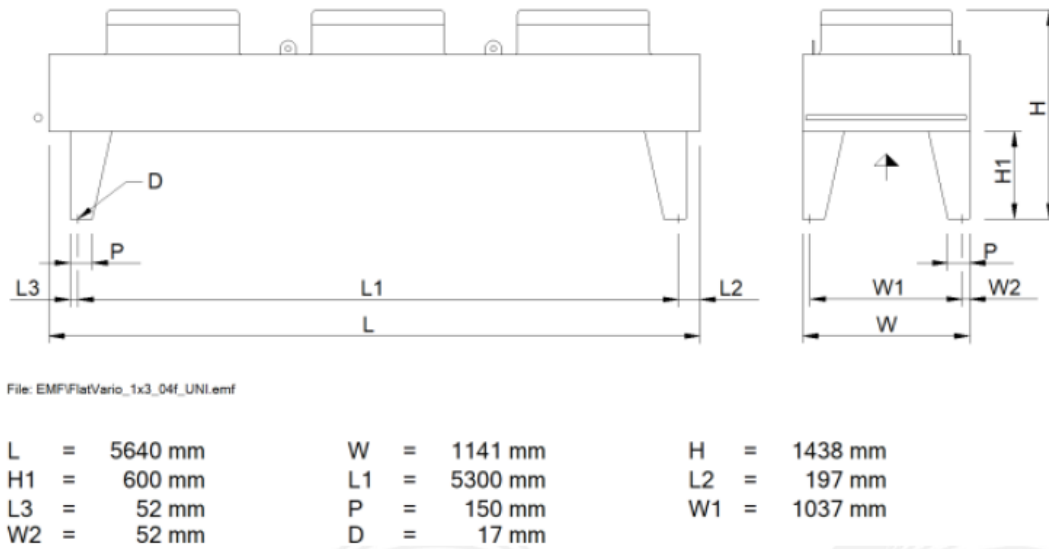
dry cooler dimensions, will be placed on top of the container in the HYPOBATT demo.
